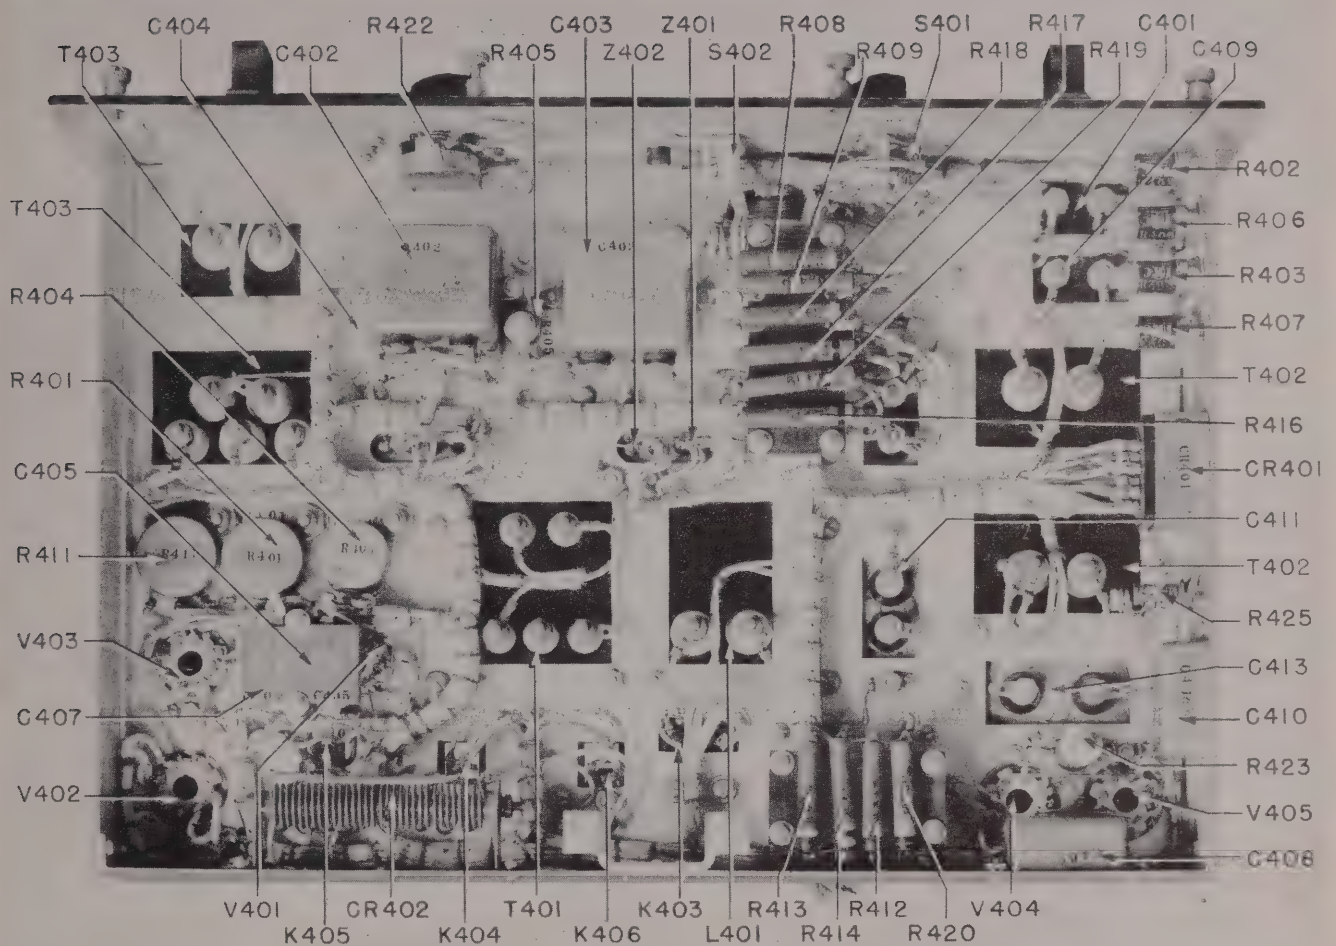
Indicator ID-70/CRN-10—Bottom View of Chassis
